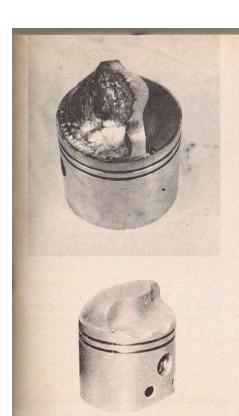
580 piston with exhaust slope filled by heli-arc welding.
